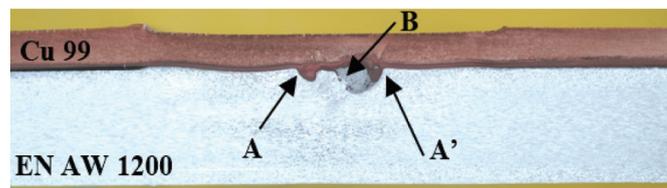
Macroscopic analyze of FSW weld Cu 99 - EN AW 1200.
